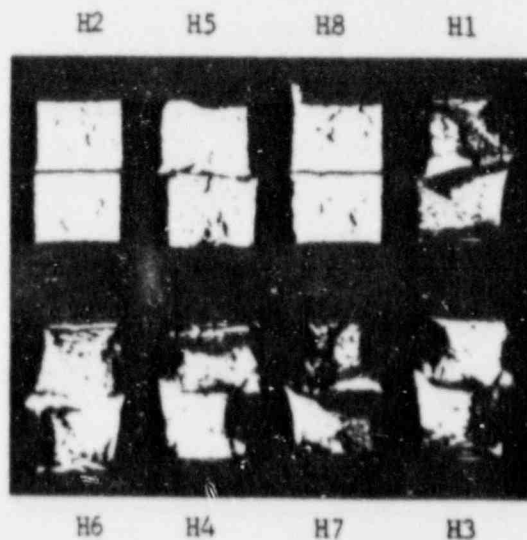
CHARPY IMPACT SPECIMEN FRACTURE SURFACES FOR
